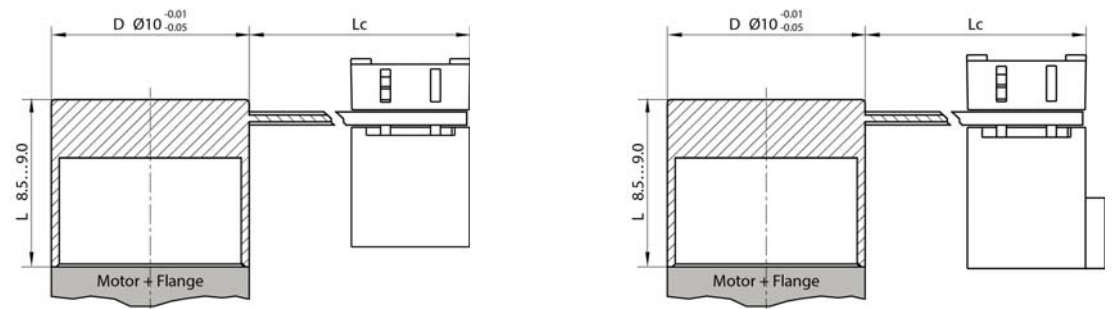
Dimensional Drawing [mm] – ENX 10 QUAD with 6pole IDC Connector (left) / with 10pole IDC Connector (right)
